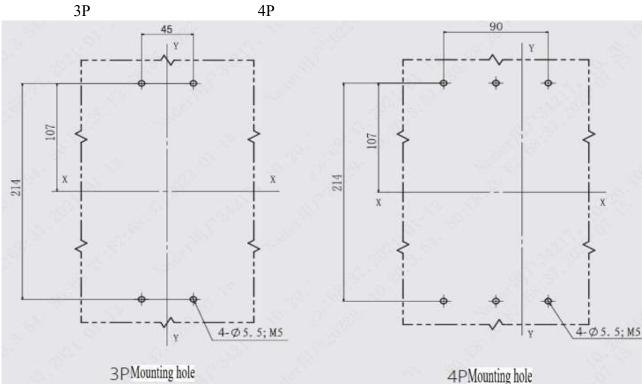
NDM5E-400/630 External Dimensions Of Front-Panel Connection Products
